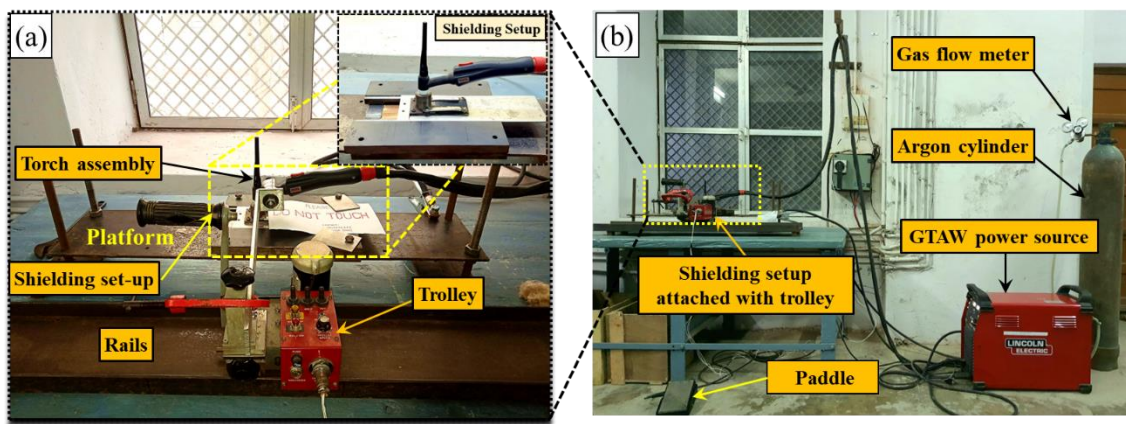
Experimental p-GTAW welding set-up highlighting shielding set-up in inset
